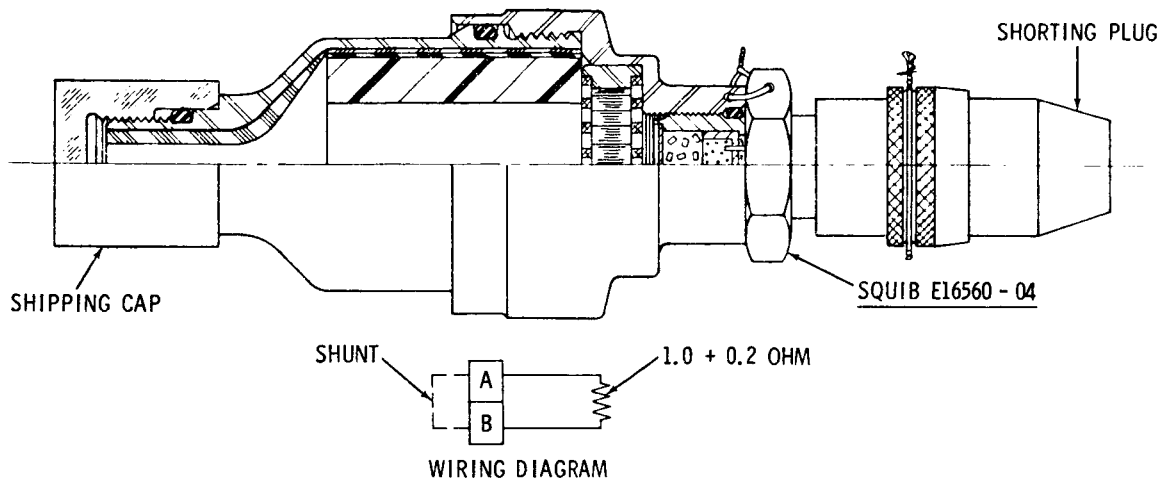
Igniter Assembly (TE-M-458 Motor)
